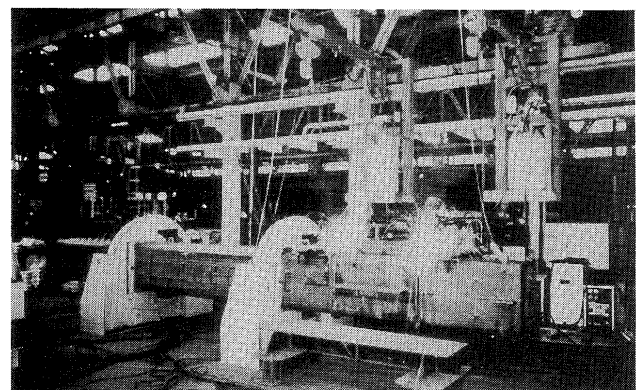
Linear slide multi-pass welding robot system for core assembly
